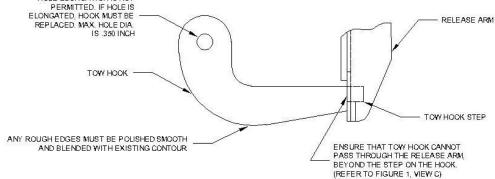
PULL TEST OF TOW RELEASE ASSEMBLY
